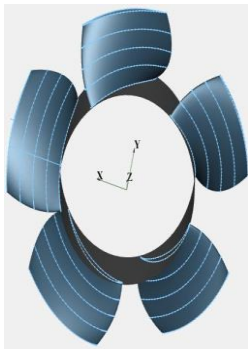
Axial flow pump impeller FIG 2. Impeller Radius
